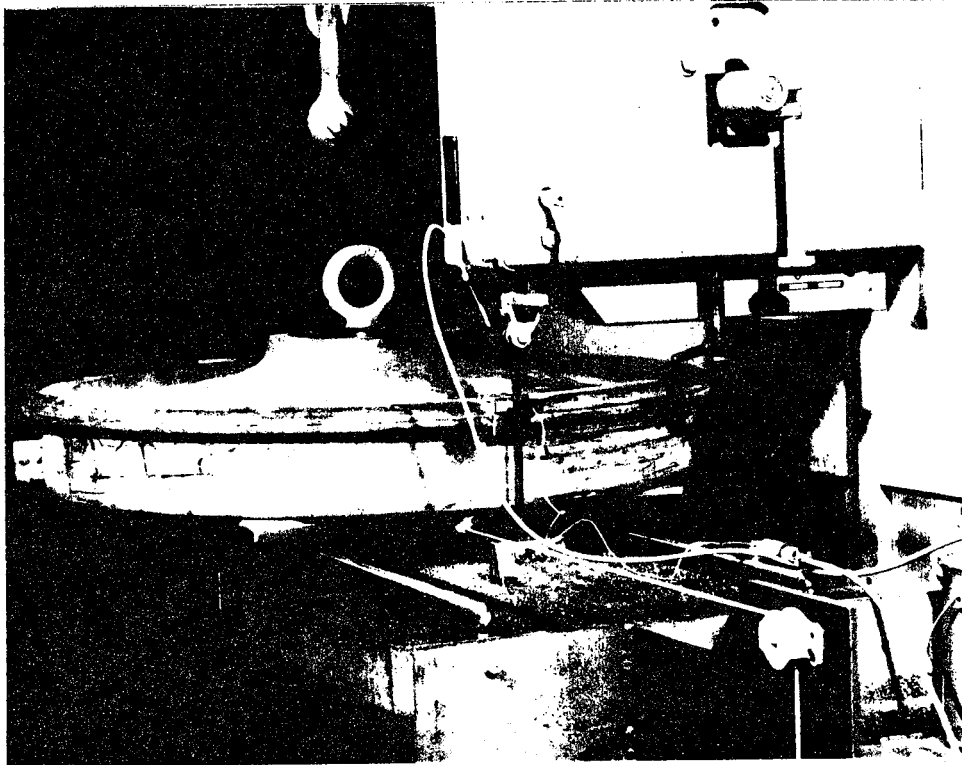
SAW-CUTTING UNIT WITH CLIP GAGE MOUNTED ON THE FLANGE TIP OF TEST WHEEL.
